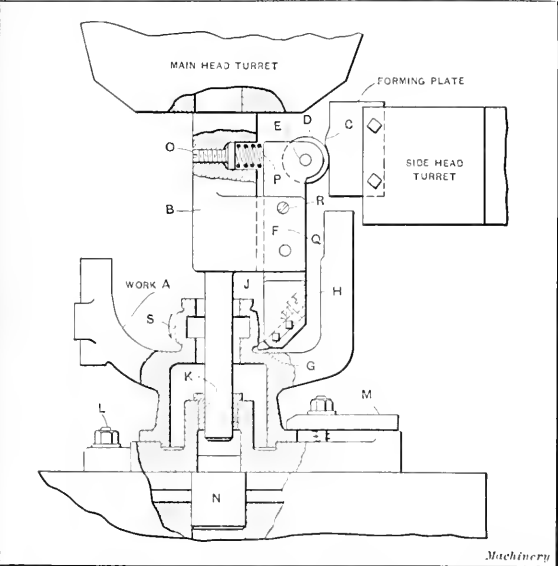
Attachment for Convex Turning in Vertical Turret Lathe
